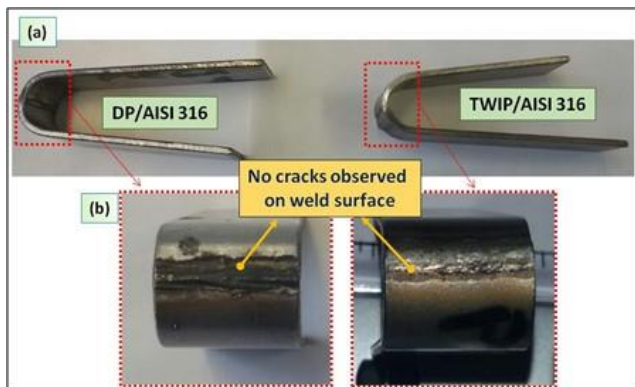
(a) Joint appearance after the bend test. (b) Frontal views shows the absence of cracks on weld surface.
